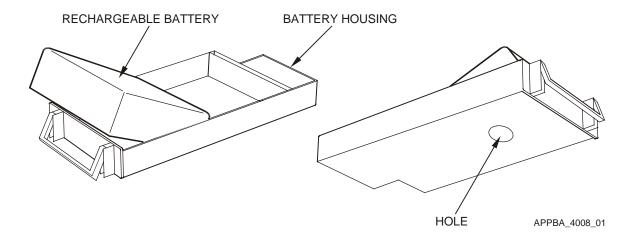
Install Rechargeable Battery in Battery Housing Assembly
